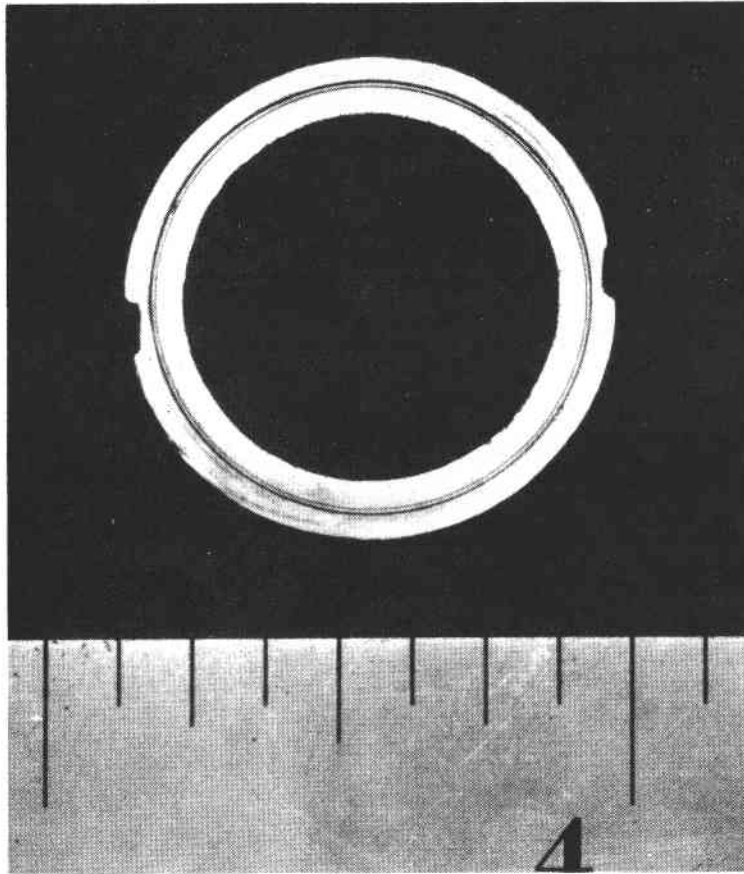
Consumable Insert for Tube Orbital Welds
